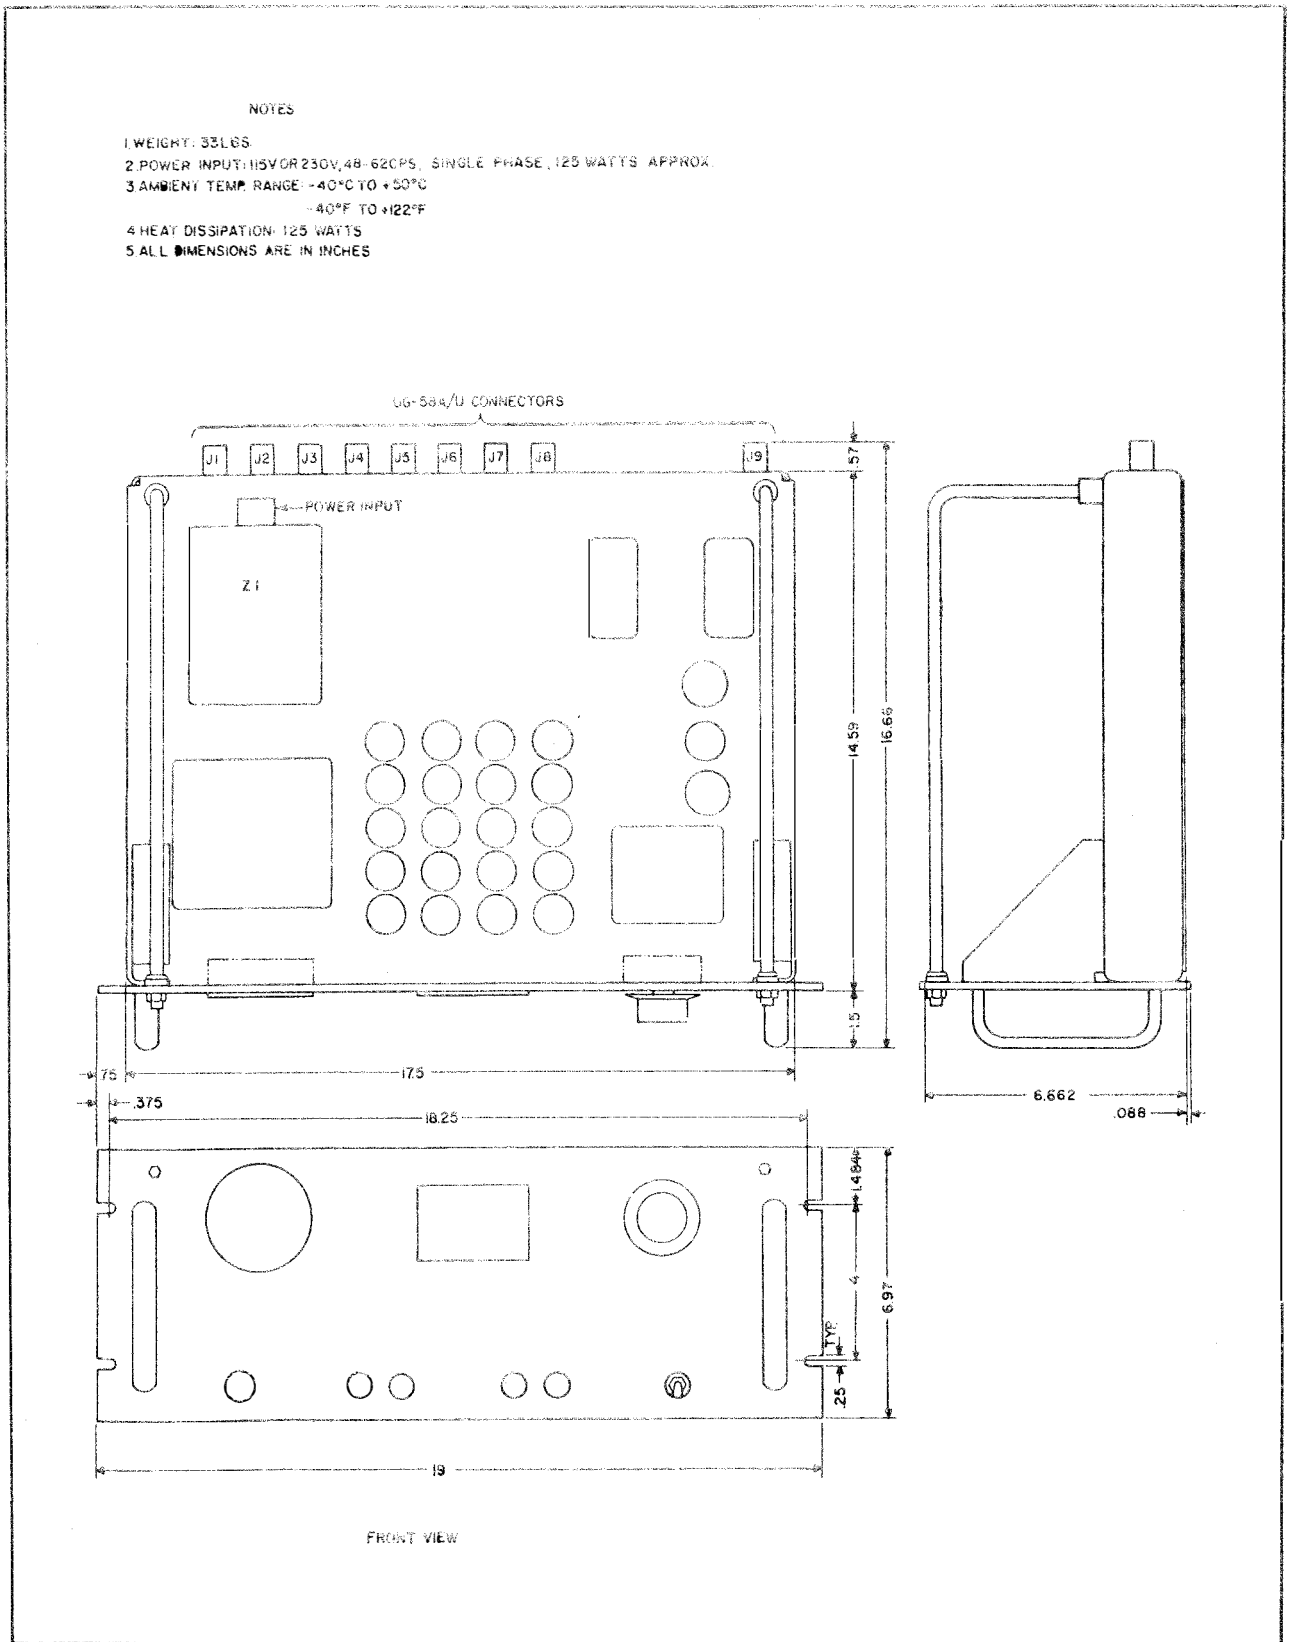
Antenna Coupler CU-873/U, Outline Drawing
